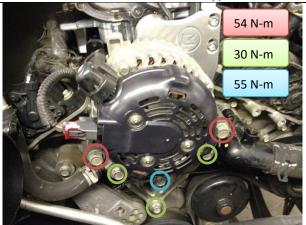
Alternator, support bracket and plate with pulley installed properly.
